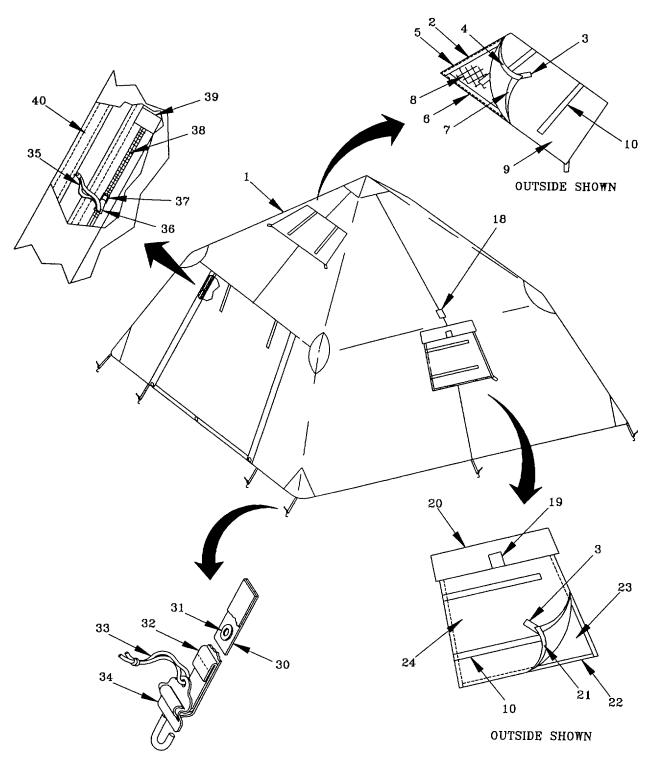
Fly Assembly (Sheet 1 of 2) F-25
